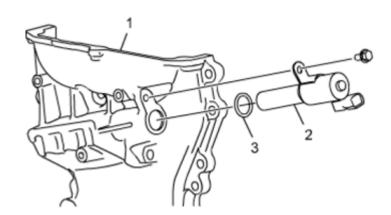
Identifying OCV, O-Ring And Timing Chain Cover Courtesy of SUZUKI OF AMERICA CORP.
